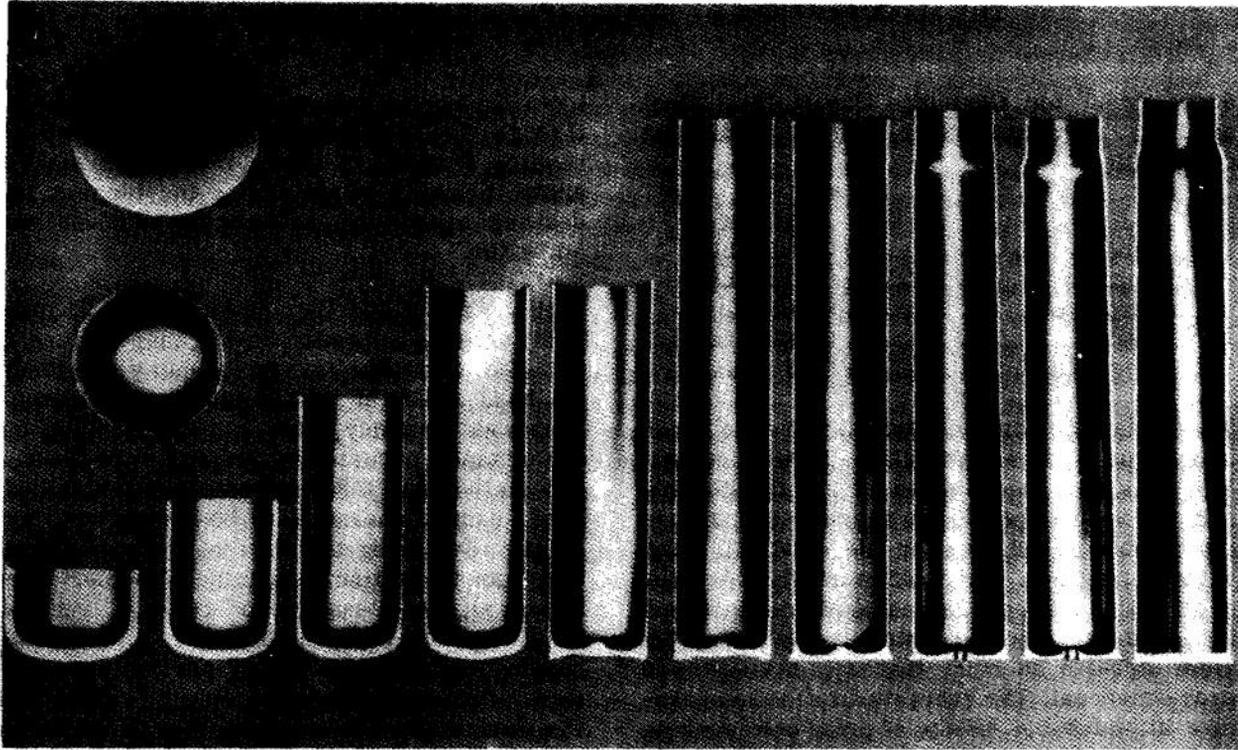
Progressive drawing of forming and machining operations required to manufacture a typical steel cartridge case, from the blank to the finished case
